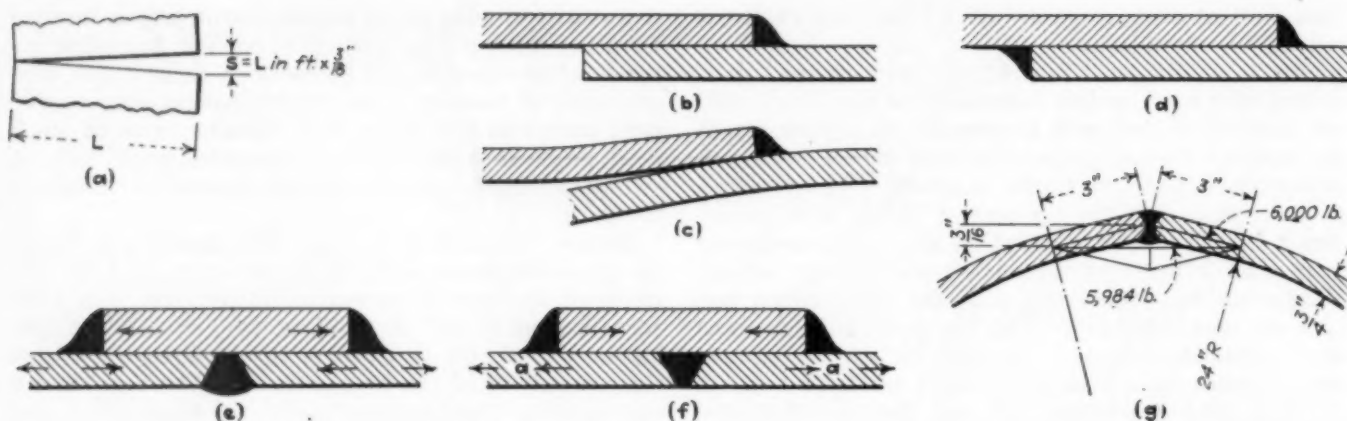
(a) Proper divergence of plates in welding; (b) and (c), showing what happens in a single-weld lap joint; (d) satisfactory type of lap joint; (e) and (f), examples of butt-
